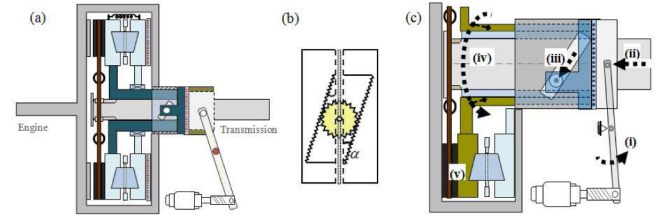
(a) Sectional drawing of the self-energizing clutch actuator system, (b) implementation of the self-energizing mechanism by installing the pinion guide gears between the actuation and fixed plate, (c) operating schematics of the clutch actuation for engagement.
